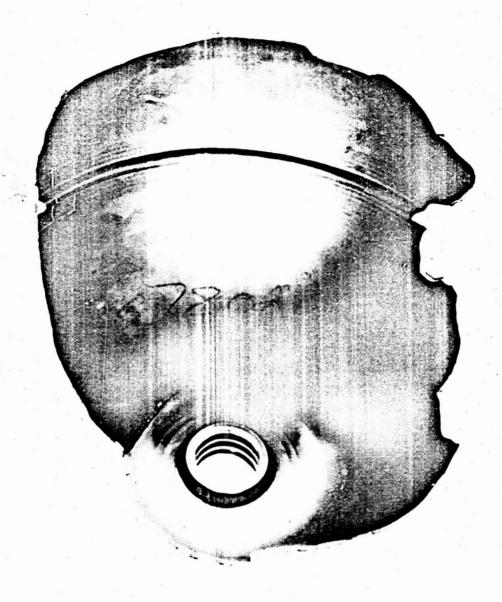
Section of Burst-Tested Titanium Alloy Gas Bottle Manufactured by Pressure Welding.
